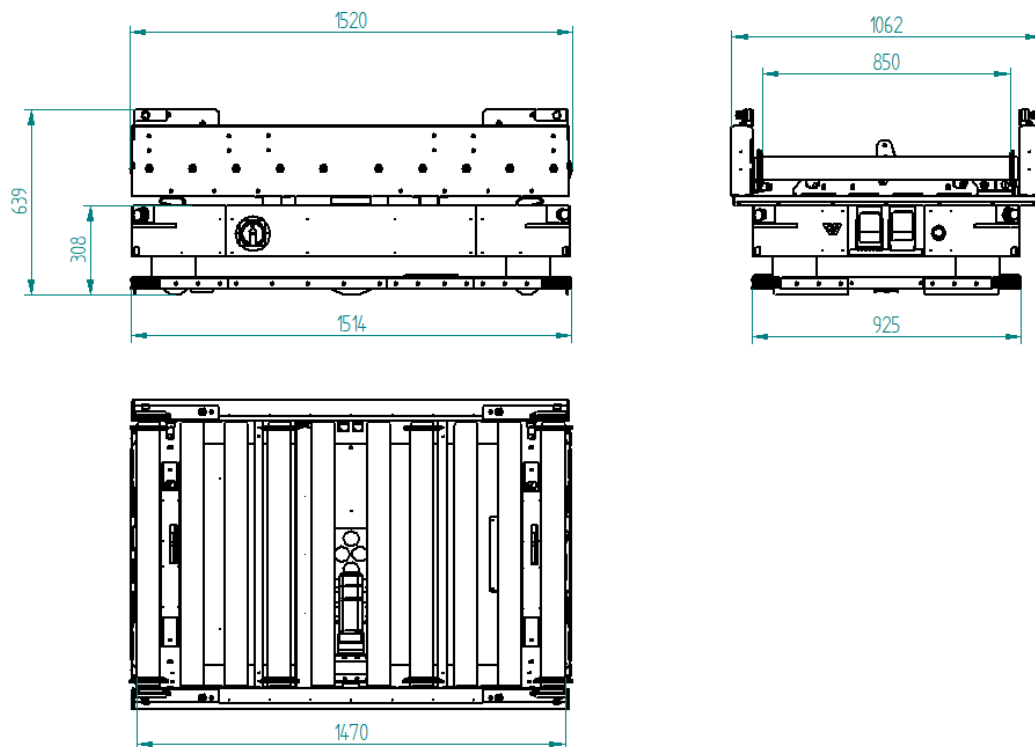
VERSABOT 1500 Dimensions (with roller conveyor module)
